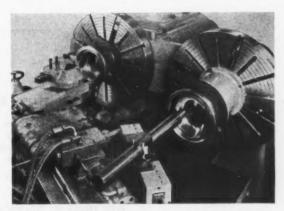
A Schaerer lathe equipped with a rotating master holder being used to copy an existing mould.
